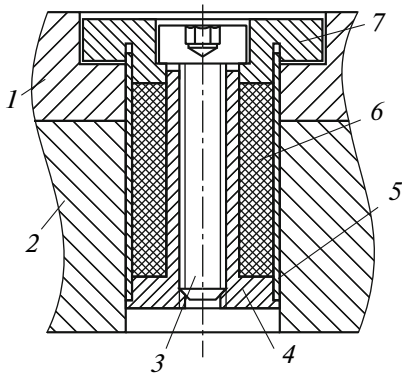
Self-centering composite bush for gap-free basing of the clamping attachment's components.
